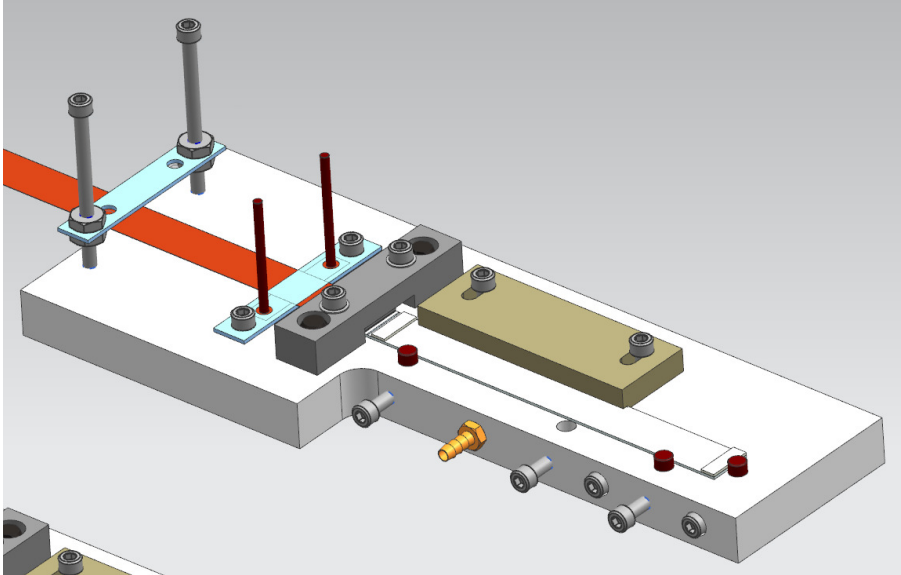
Fixture for flex cable lamination to the pitch adapter
